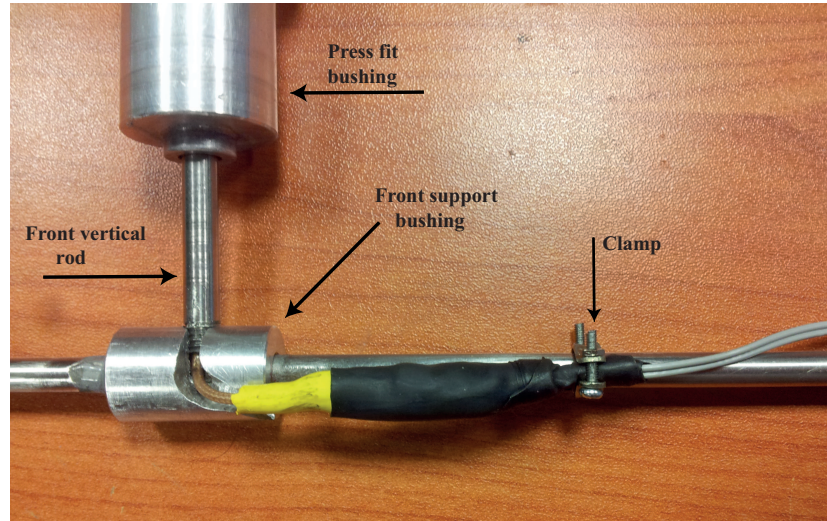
Shaft supports after the improvements. We can see the stable coupling between the new supporting bushing and the new vertical rod, the milled cable rail and the cable clamp.
